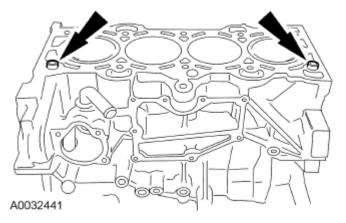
Locating Cylinder Head Alignment Dowels Courtesy of FORD MOTOR CO.
